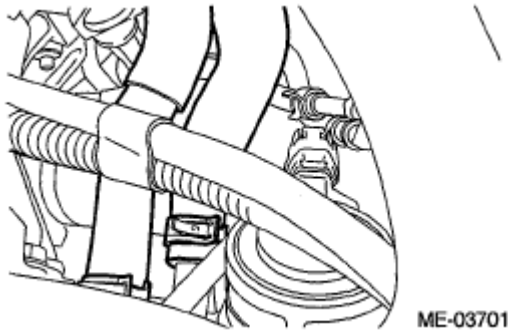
Identifying Heater Inlet And Outlet Hoses
